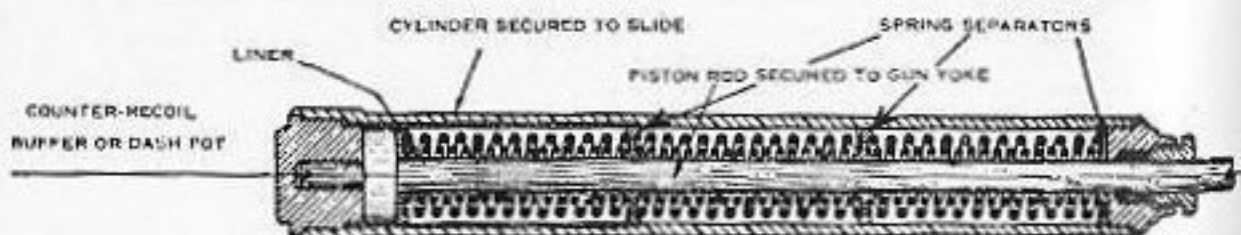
TYPICAL SPRING COUNTER-RECOIL SYSTEM MINOR CALIBER MOUNTS INSTALLED WITHIN RECOIL CYLINDER.
